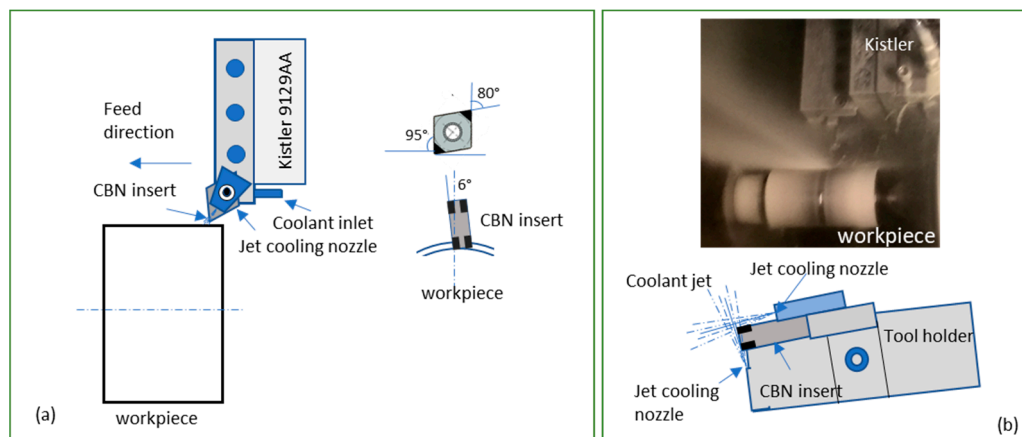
(a) Experimental setup and (b) tool geometry and jet stream cooling configuration.
